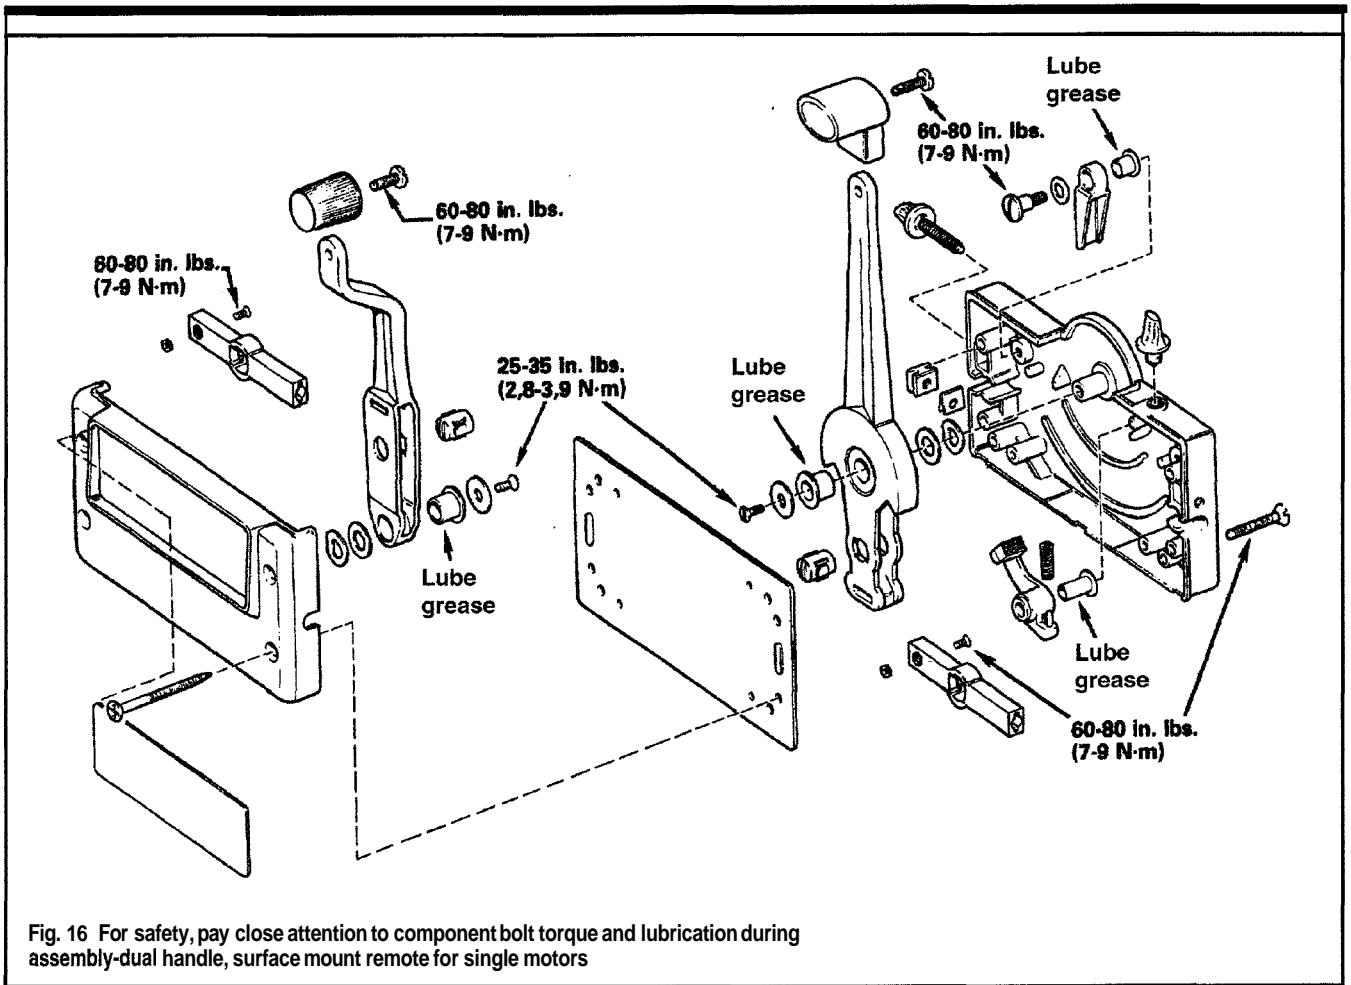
Exploded view of a dual handle, surface mount remote for single motors
